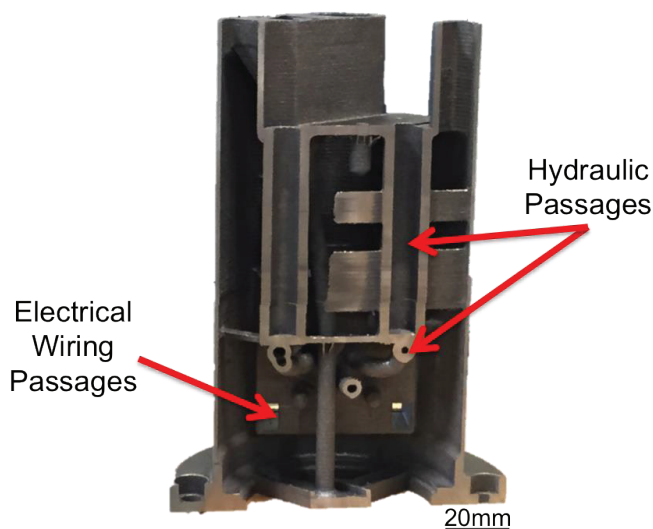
Cross-section of a manipulator arm component depicting the internal hydraulic channels and routings for electrical wires.
